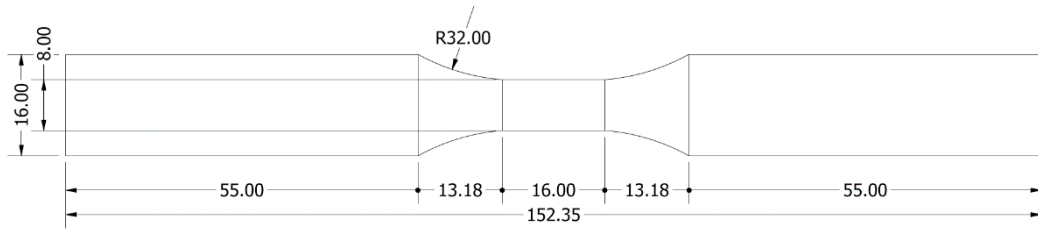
Fatigue and tensile specimen geometry (round) with dimensions in mm according to ASTM E606
